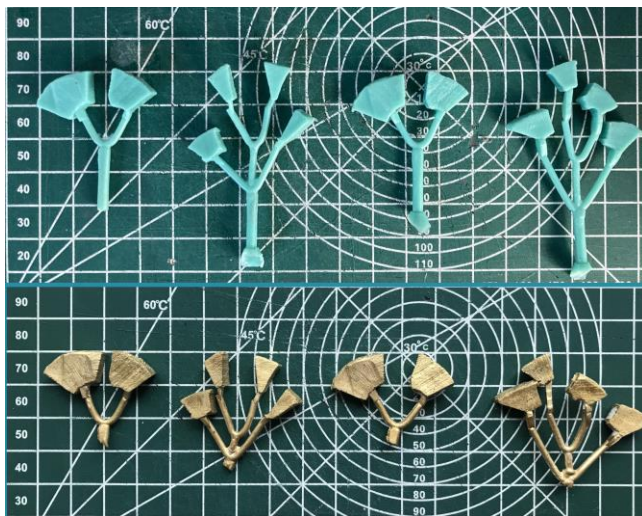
Upper photo with wax moulds before metal casting and lower photo with brass moulds after casting.
